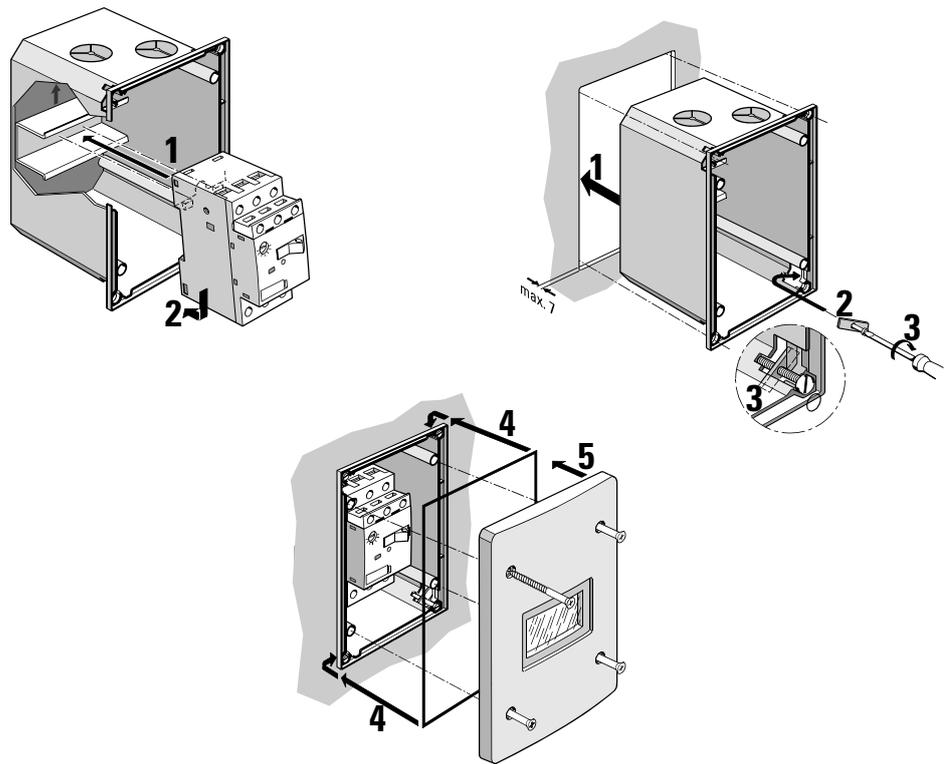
Molded plastic flush mount enclosure (example: frame size S00)
